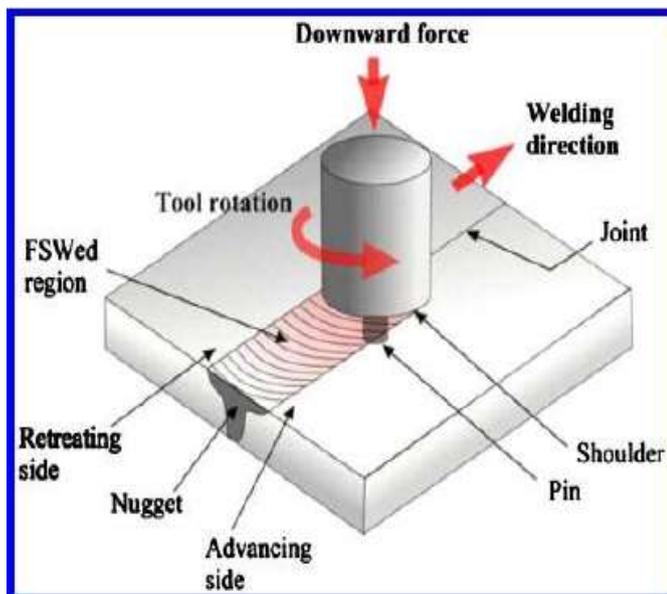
Principal of Friction Stir Welding ^[1]
